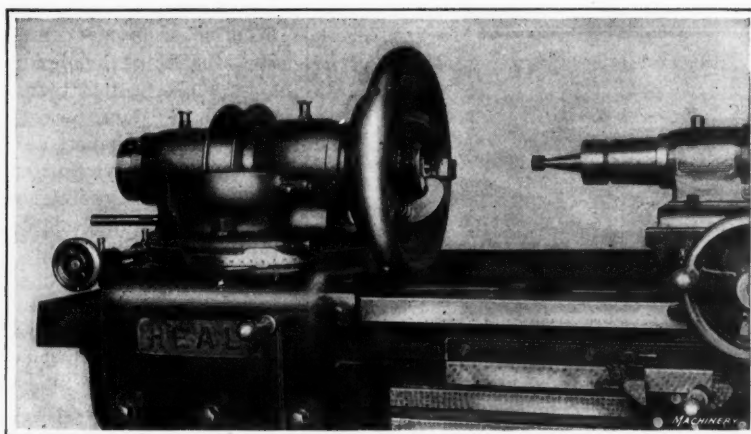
Interesting Chuck for holding Small Bevel Pinions
